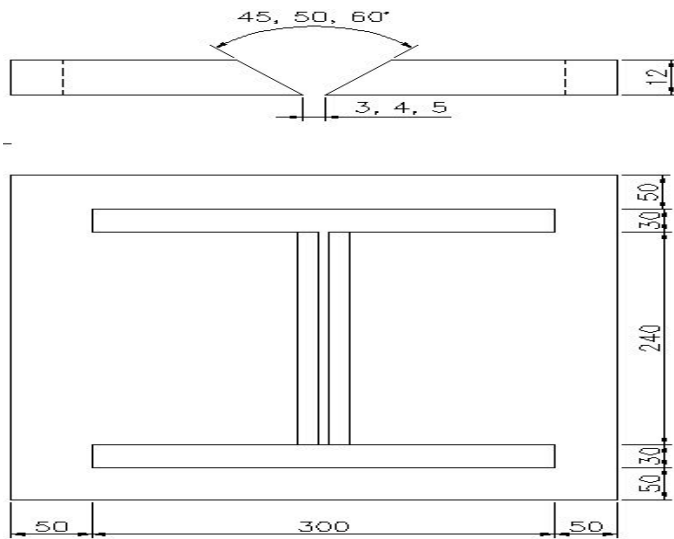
Constraint welding joint shape of specimens
